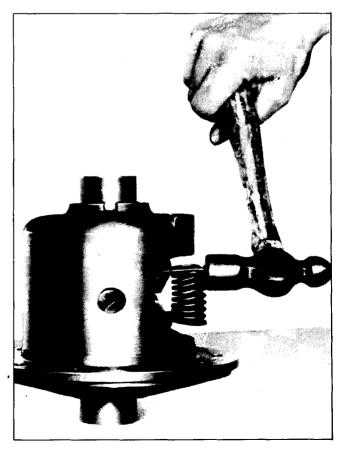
D-10 Installing Preload Springs and Retainers - Clutch Pack Type
